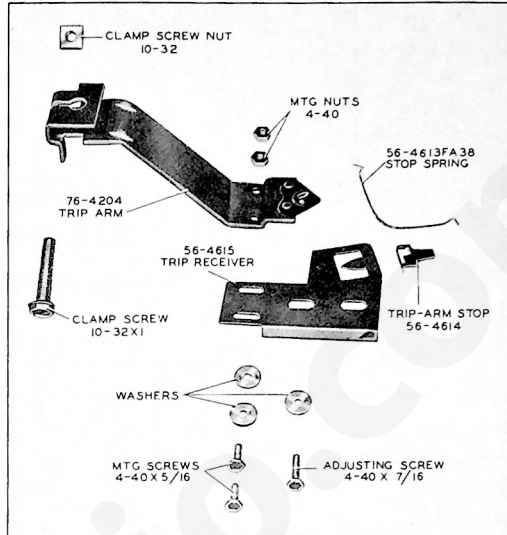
Trip-Arm and Trip-Receiver Assemblies
